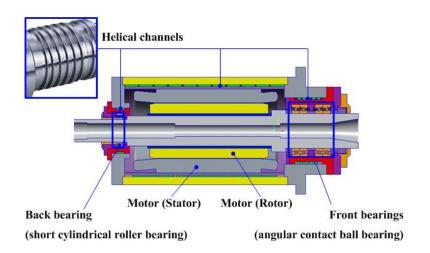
Heat generating parts and helical channels of motorized spindle unit
